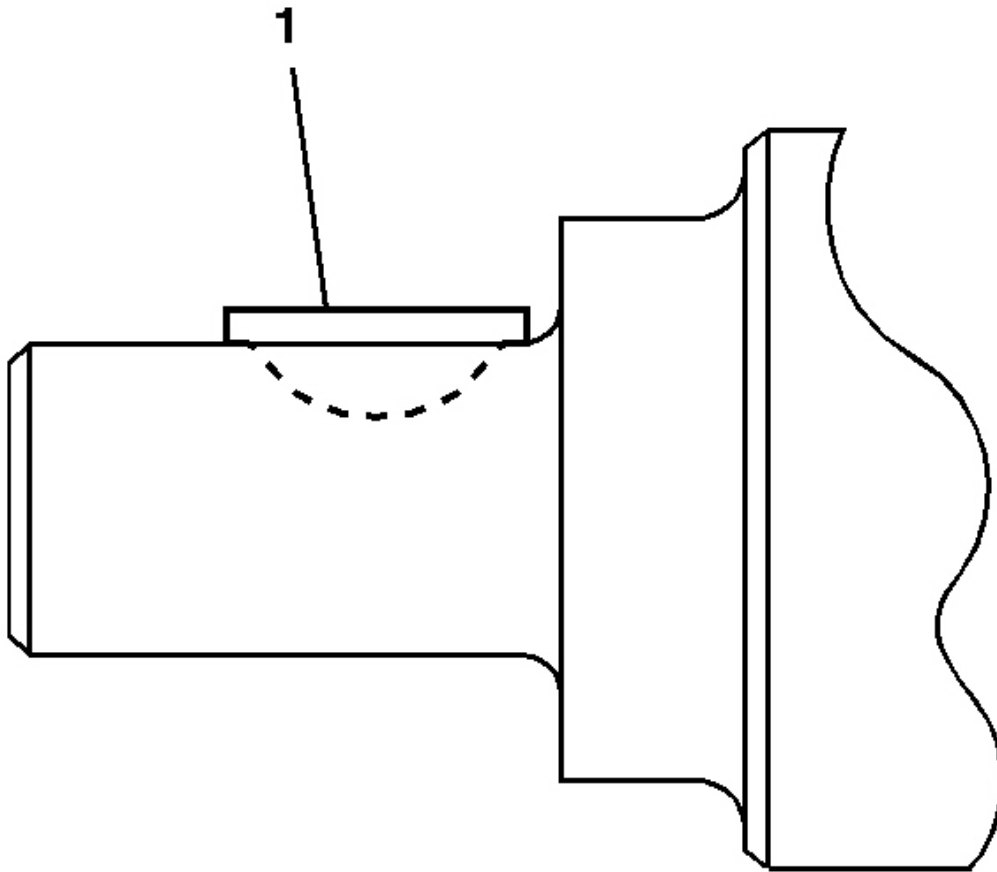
View Of Crankshaft Sprocket Key Installation Position
